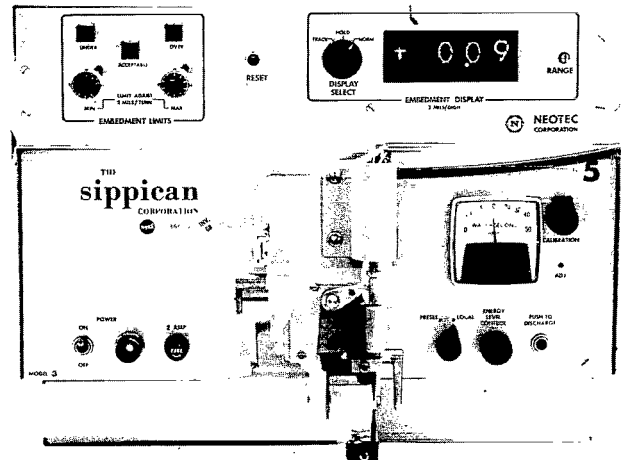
Weld quality monitor attached to opposed-electrode welding head.
